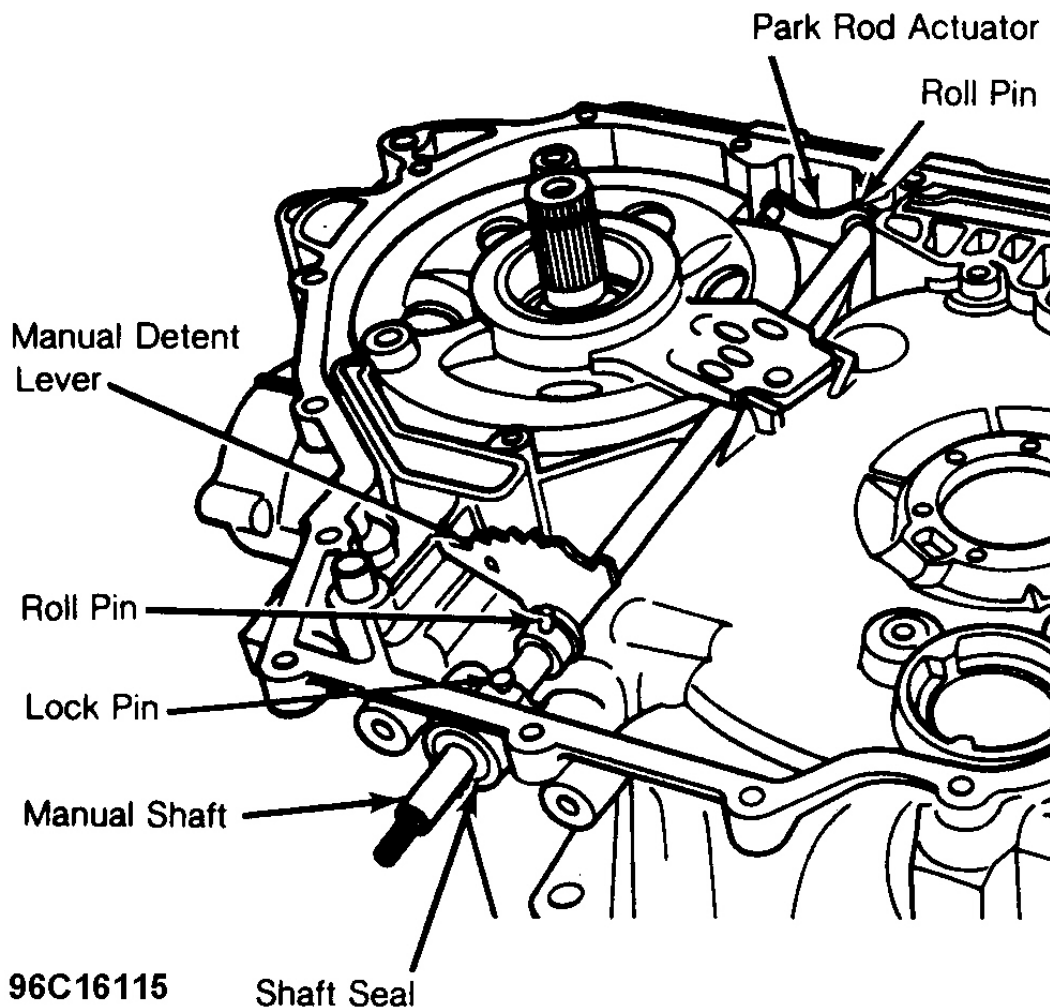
Manual Shaft Lock Pin, Roll Pins & Seal Removal
